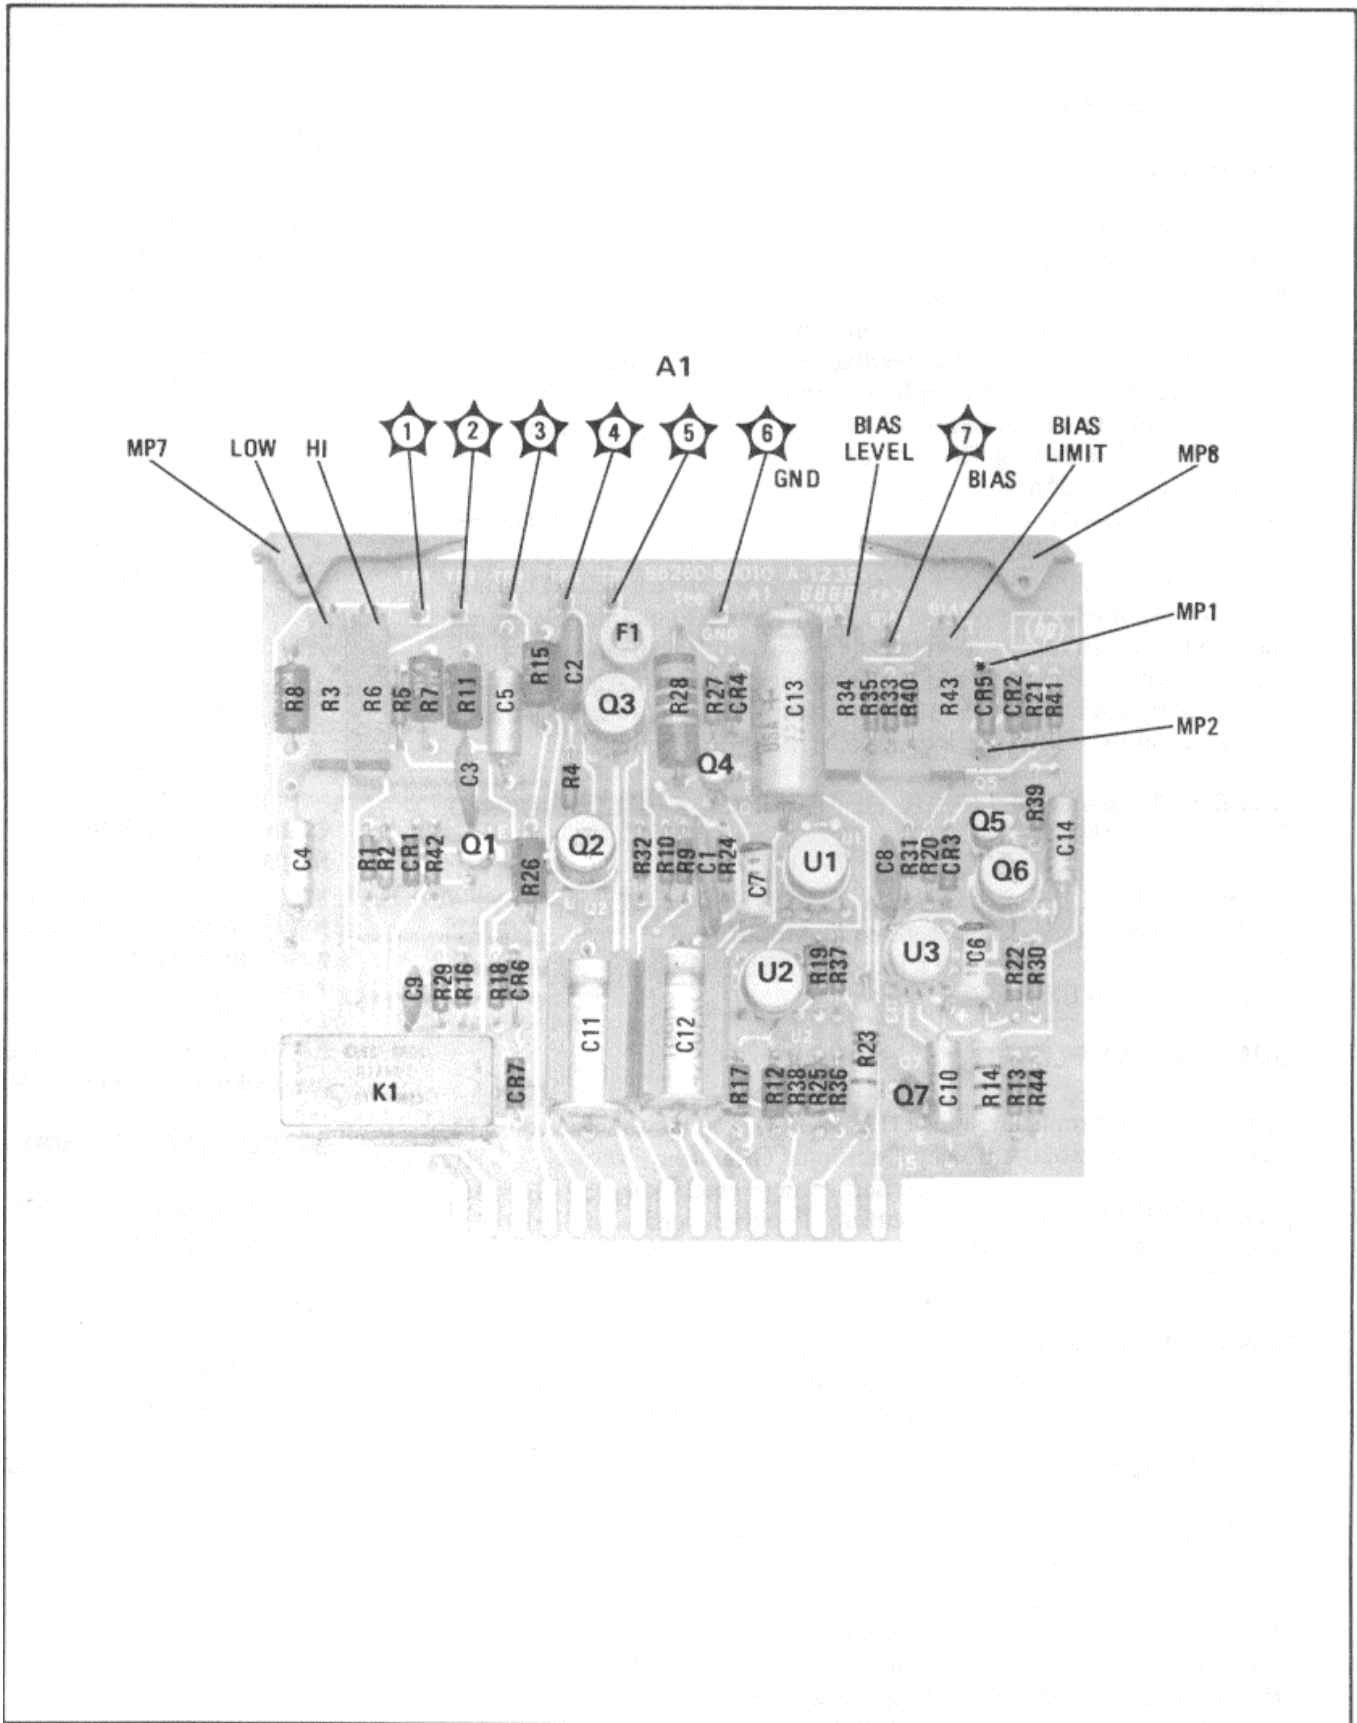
A-1 YIG Driver Assembly, Components Location
